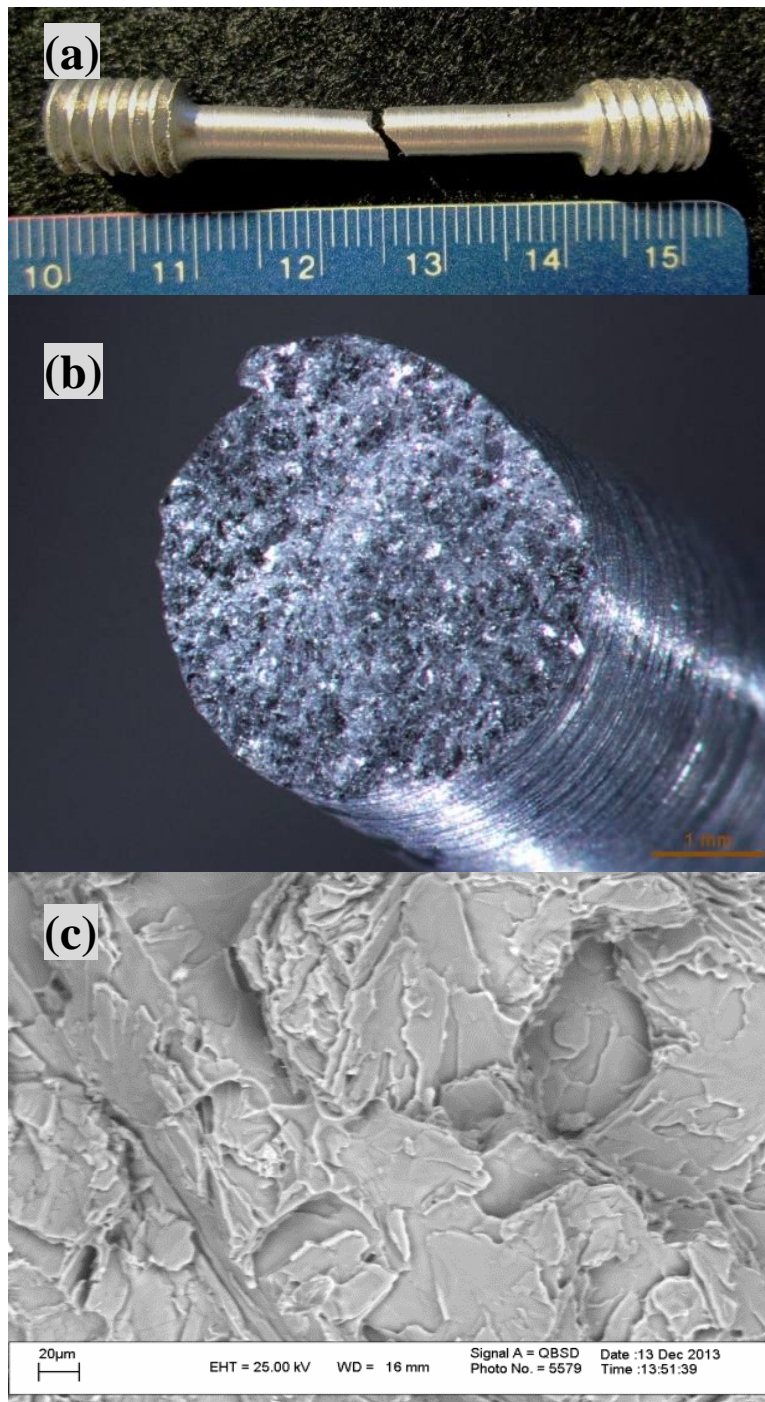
A Fractured A4047 Tensile Bar: (a) Photograph of Fractured Sample, (b) Stereo Photograph of Fracture Surface, and (c) Back-scattered Electron Micrograph of Fracture Surface.
